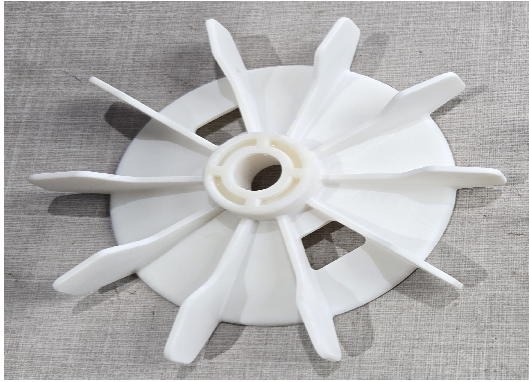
Final post-processed impeller prototype after support removal and post-curing
